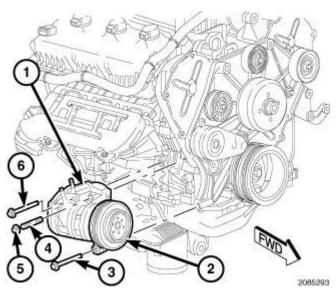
Removing/Installing A/C Compressor Courtesy of CHRYSLER LLC
